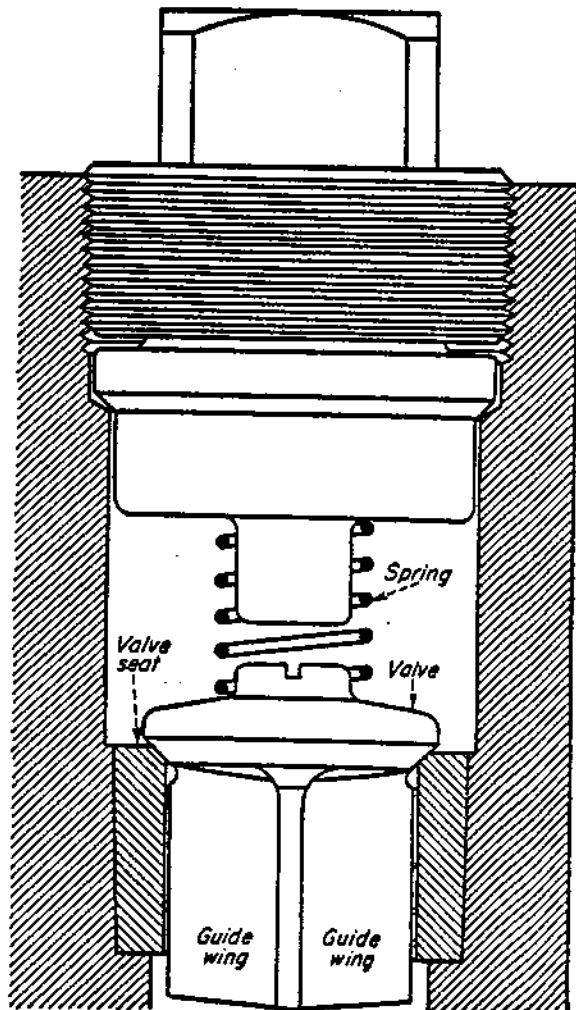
Bevel-faced wing-guided valve for high-pressure service.
